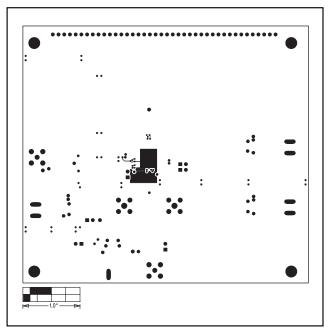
MAX5888 EV Kit PC Board Layout—Solder Side
